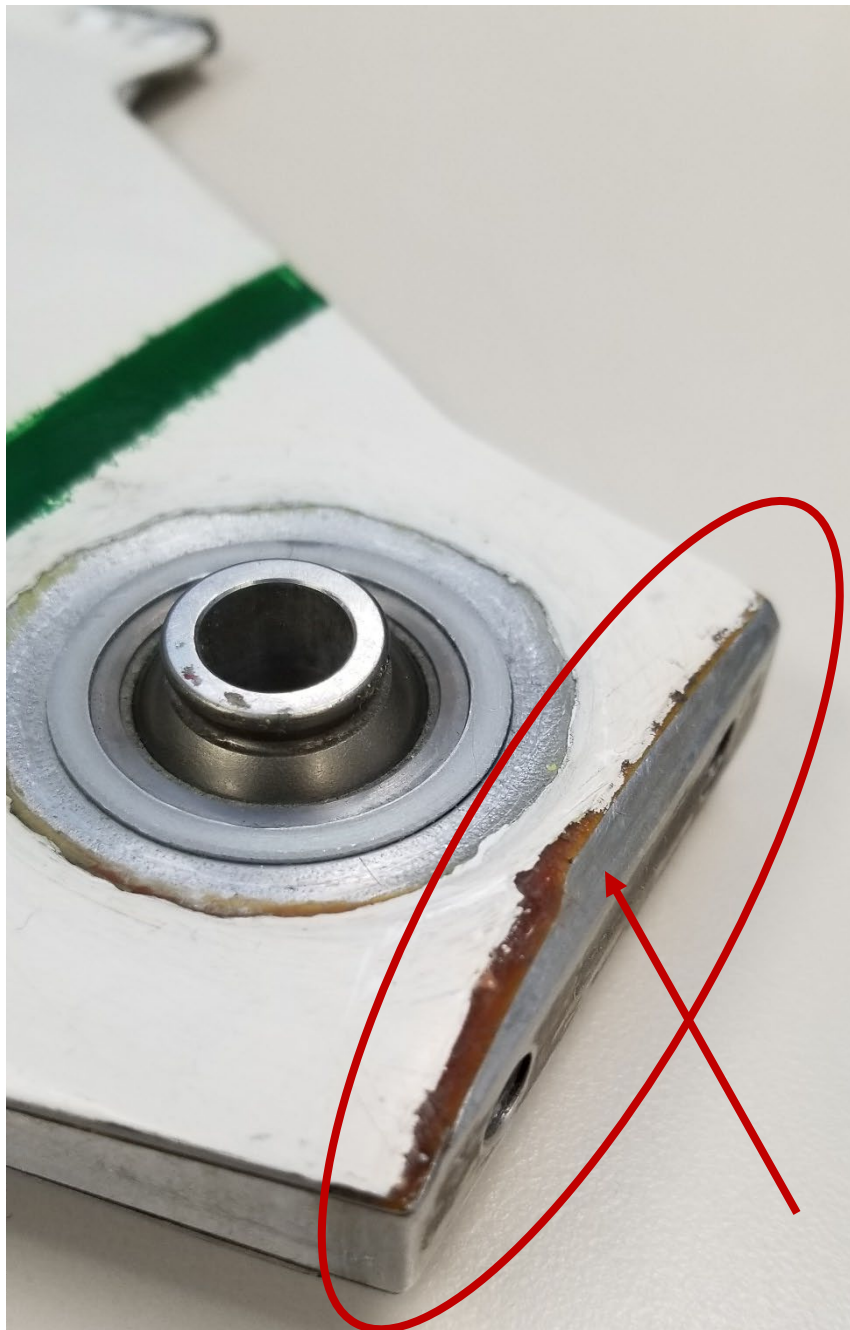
Example of Tail Rotor Blade Root End Tapered Aluminum Butt Block
